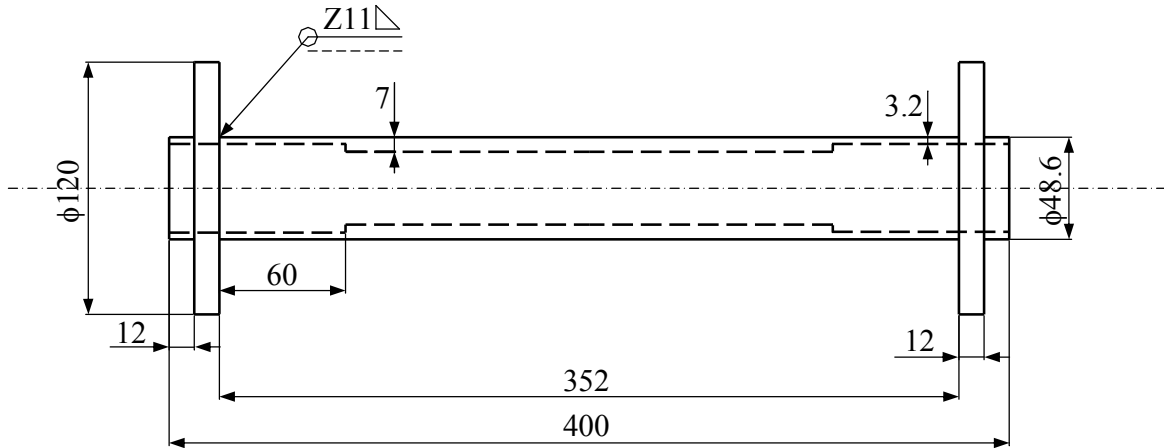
Steel welded joints tested by Razmjoo [20].
